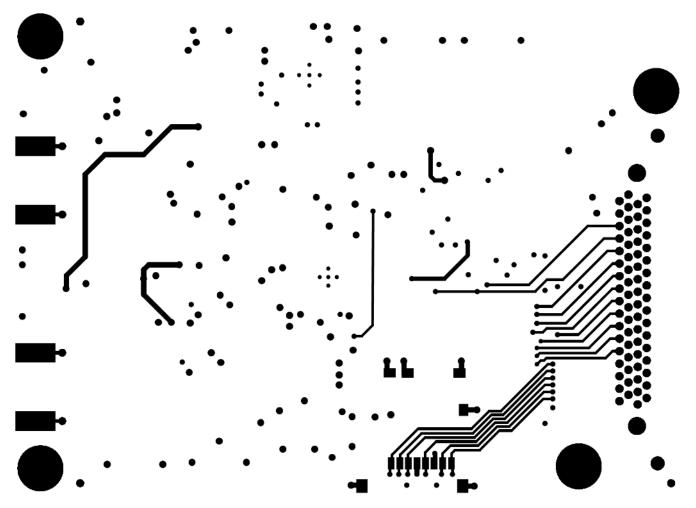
ADS9110EVM PCB Layer 4: Bottom Layer
